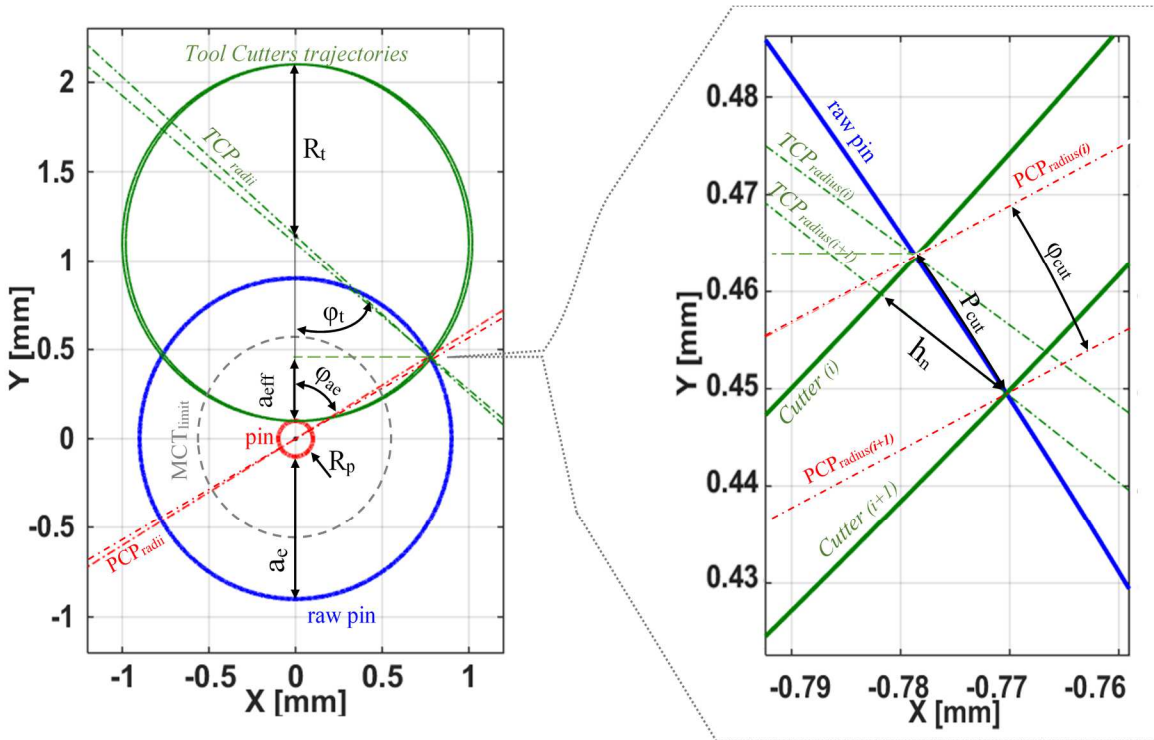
Tool engagement (A) top view, (B) detail of end contact point
